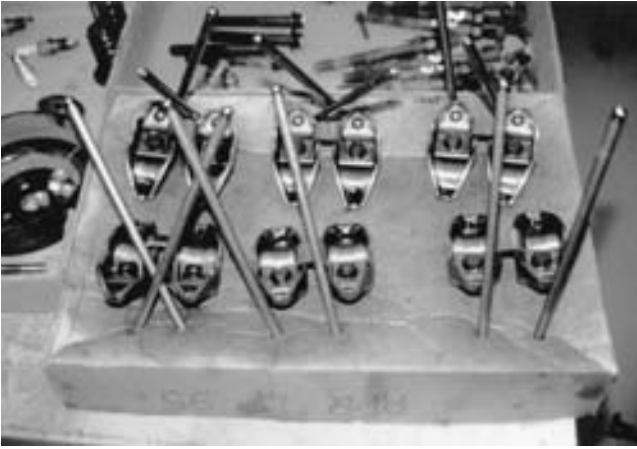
Individual parts become worn together; therefore, cardboard is a crude but effective material to use to keep all valve train parts together and labeled exactly as they came from the engine.
